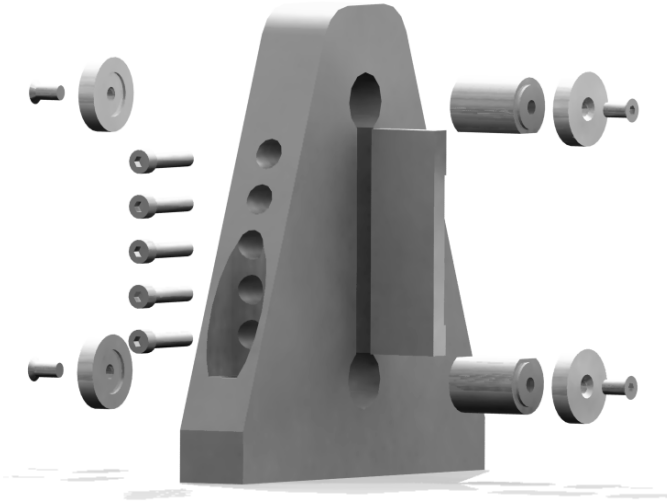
Exploded view of one clamp for the three-rail shear test.
